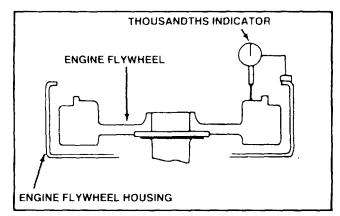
Checking the Driving Ring Surface of the Engine Flywheel Housing
